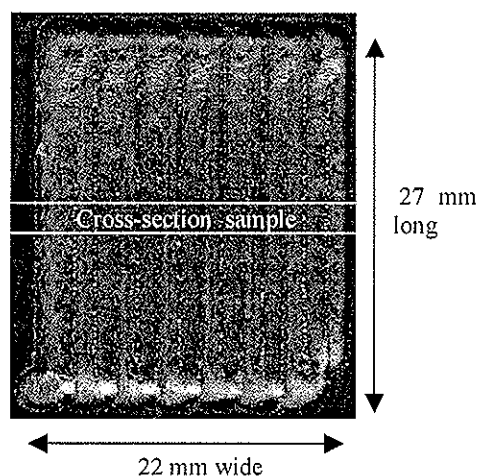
Multi-track clad sample showing dimensions and location of cross-section sampling.
